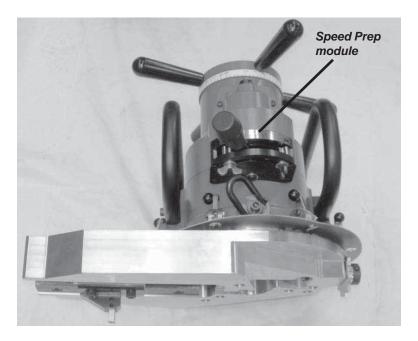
The speed prep module is installed on the main drive to operate the feed mechanism for single-point beveling.
